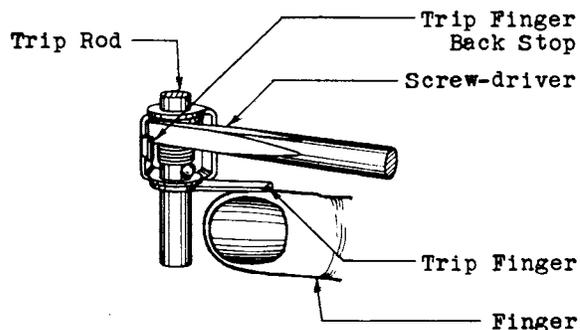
Method of Adjusting Trip Finger Back Stops
